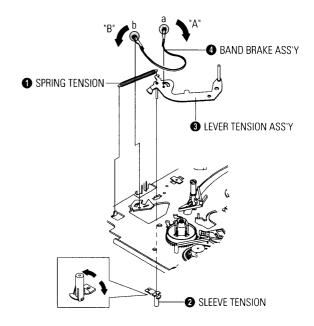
Lever Tension Ass'y, Band Brake Ass'y, Sleeve Tension Removal
